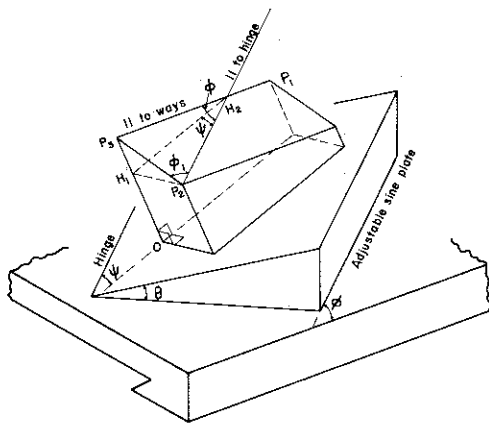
Arbitrarily inclined surface $P_1 P_2 P_3$ rotated into the horizontal with edge $P_1 P_3$ parallel to ways of milling machine.
